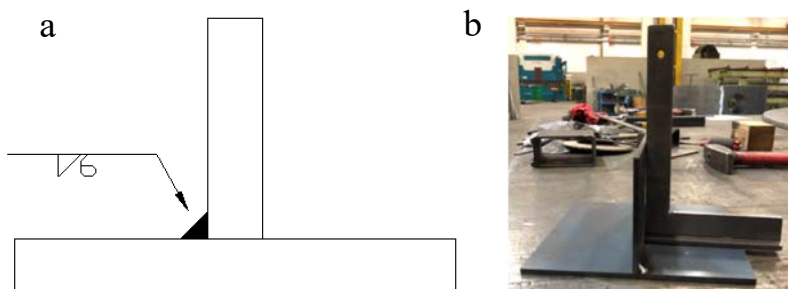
(a) Schematic of the T joint, (b) accurate plates positioning before welding
